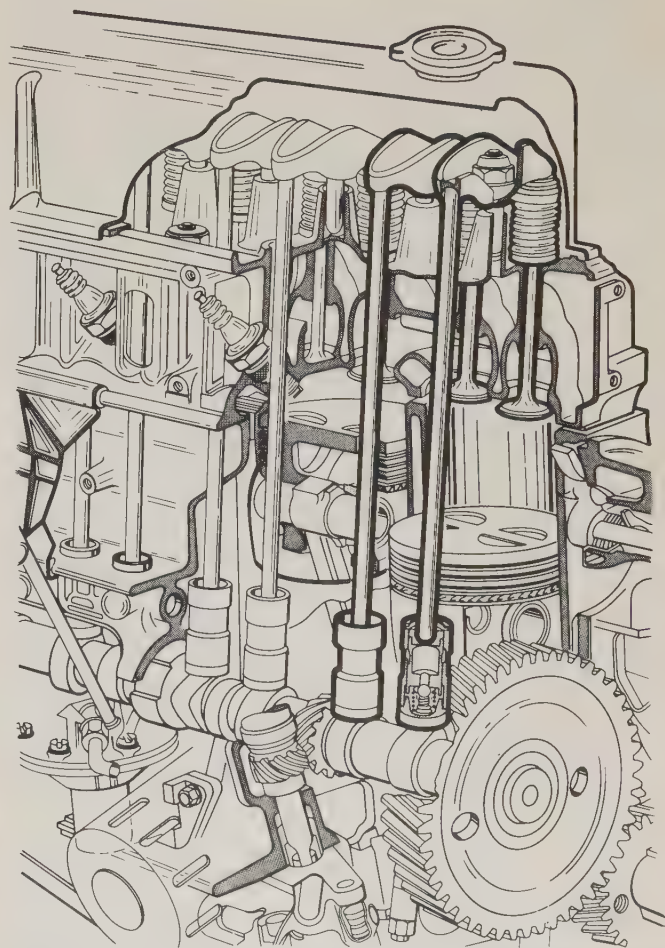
Partial cutaway view of a four-cylinder in-line overhead-valve engine.
